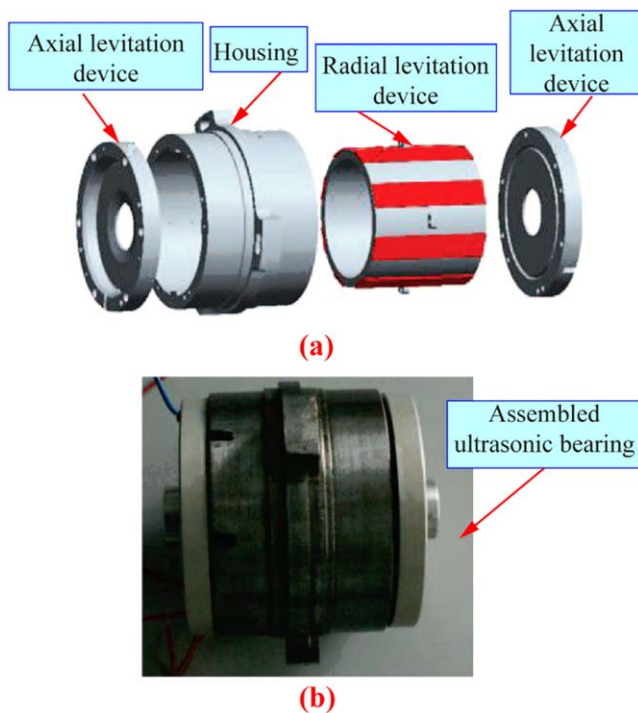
Exploded view and assembling drawing of ultrasonic levitation bearing: Wang *et al* [128]. © 2013 IEEE. Reprinted, with permission, from [128].
